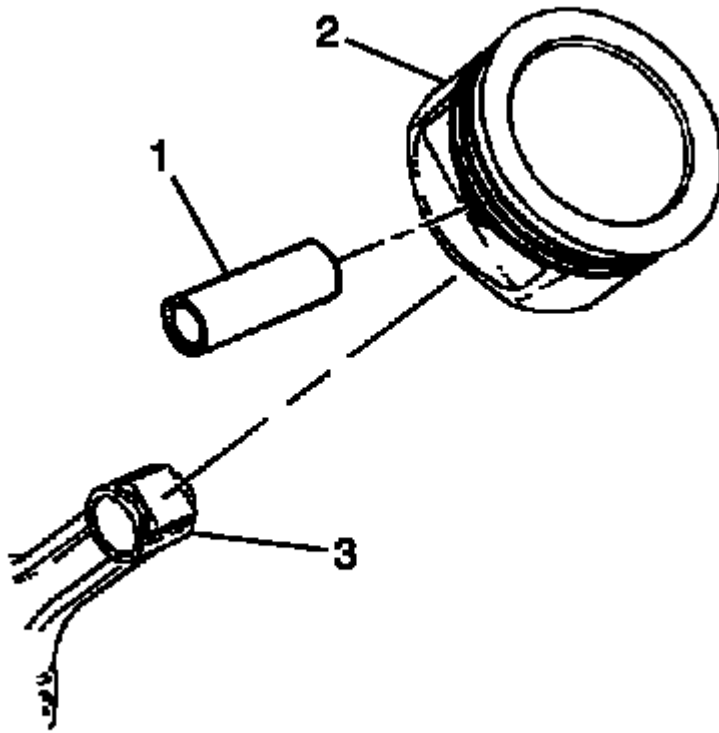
Body Wiring Harness Connector & Positive Cable Nut
